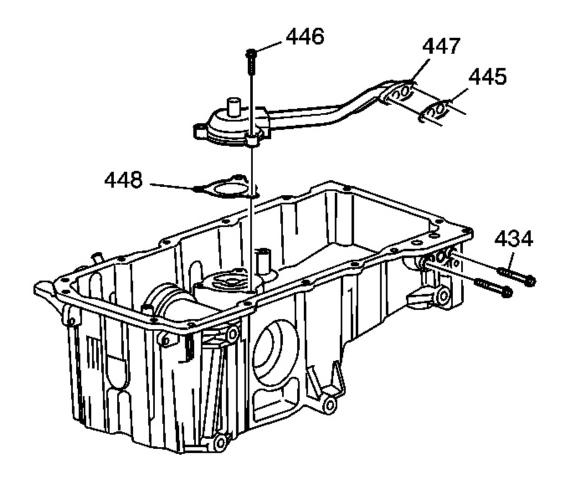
Oil Transfer Tube Courtesy of GENERAL MOTORS CORP.
